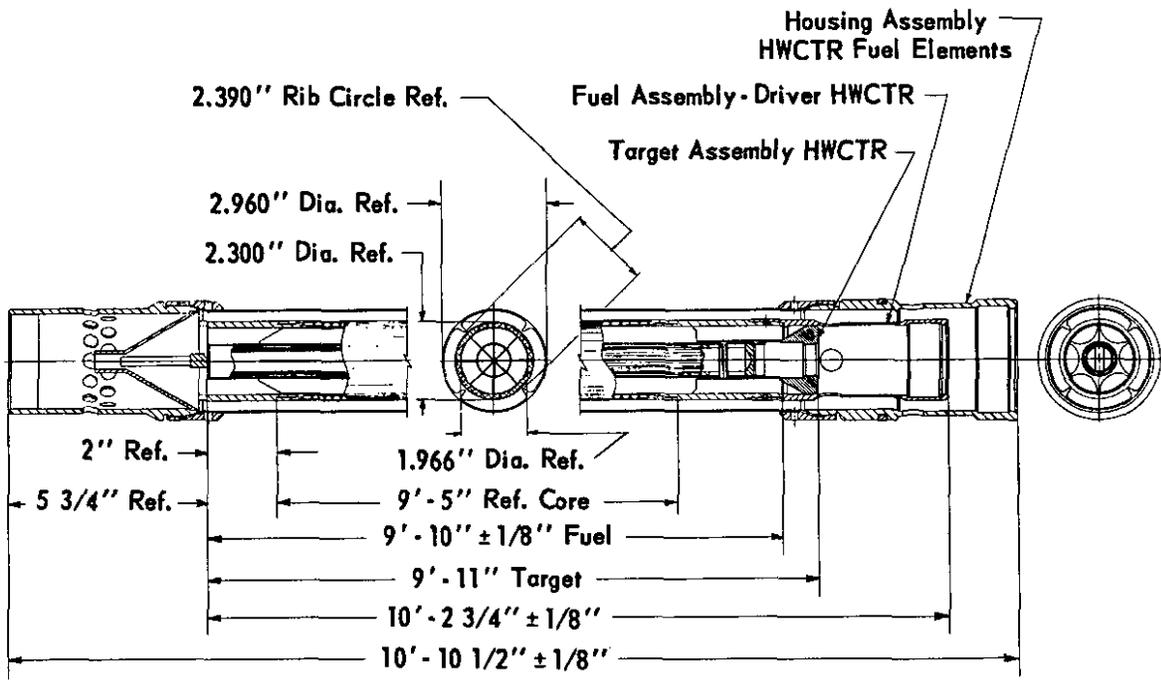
HWCTR DRIVER FUEL ASSEMBLY
